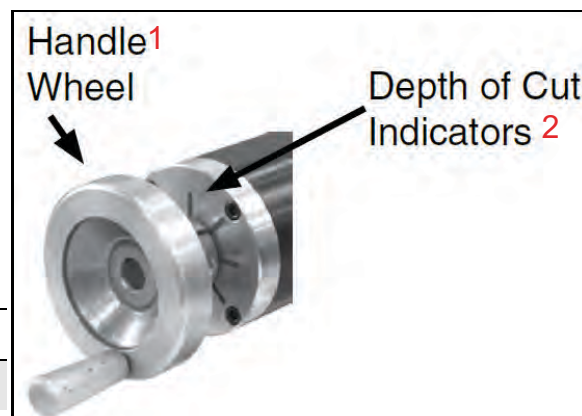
HANDLE WHEEL AND DEPTH OF CUT INDICATORS
